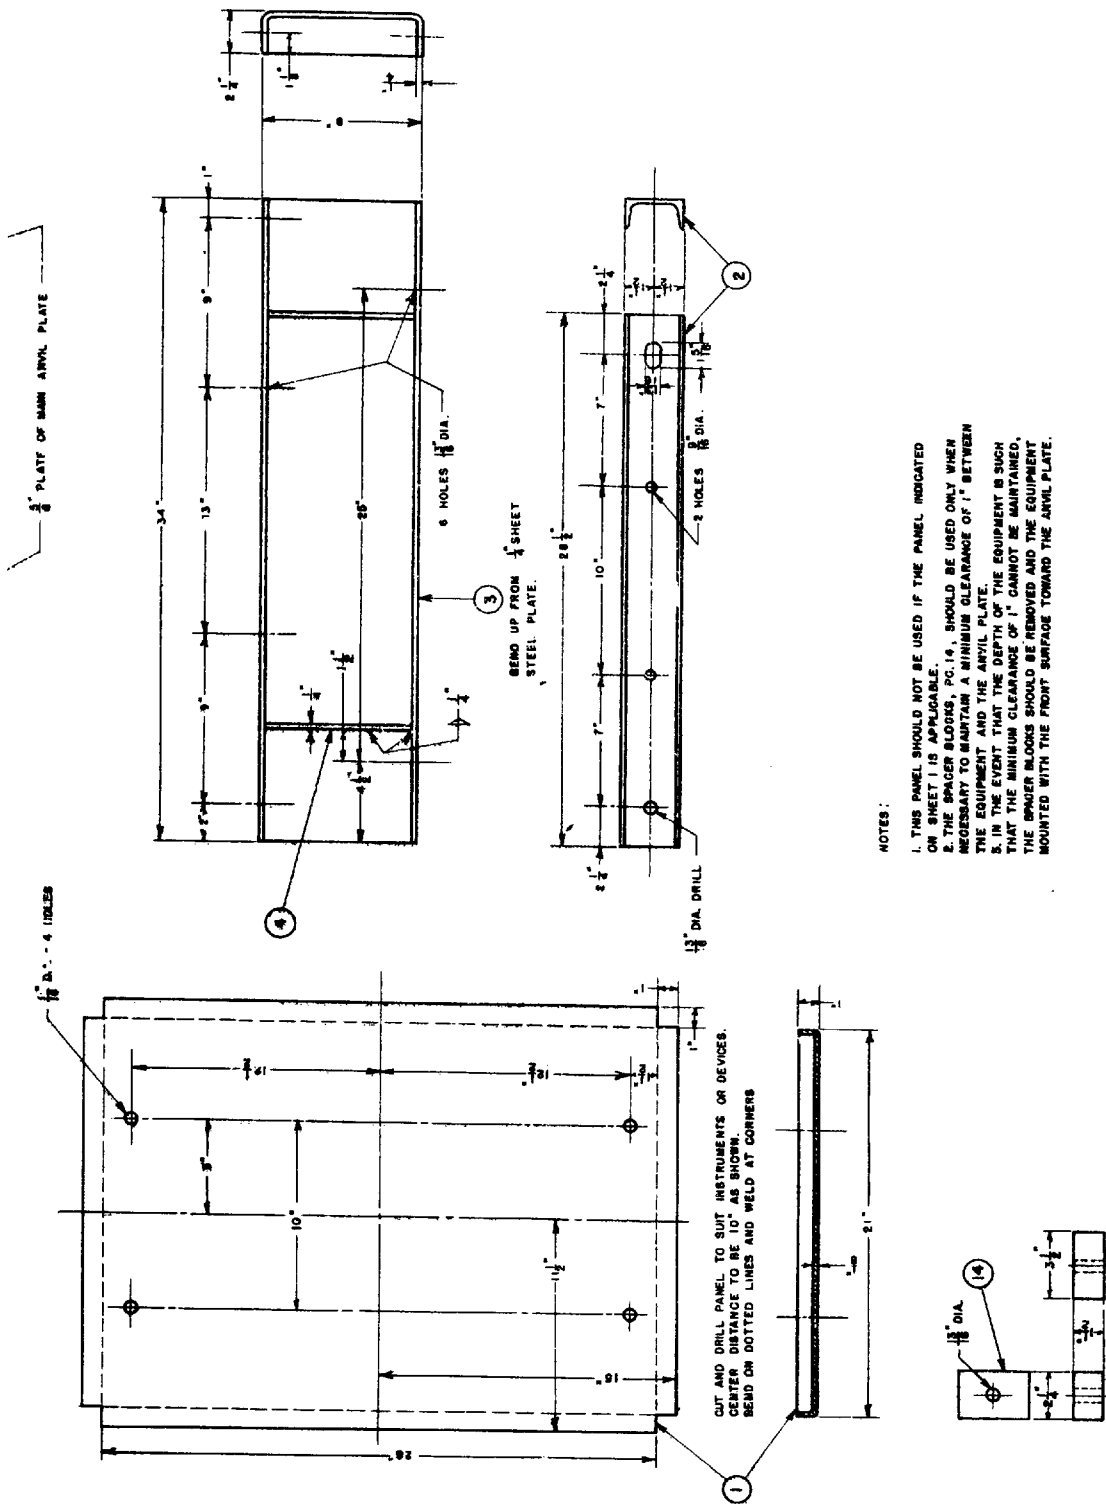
D.—Standard mounting for electrical indicating switchboard instruments and other panel-mounted equipment: Type "C" test—Light-weight equipment.
